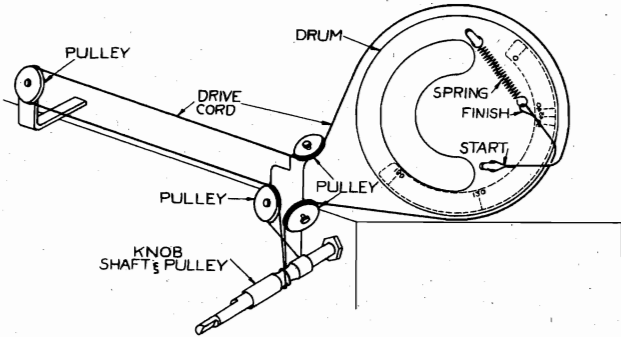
CONDENSER AND INDICATOR DRIVE CORD
